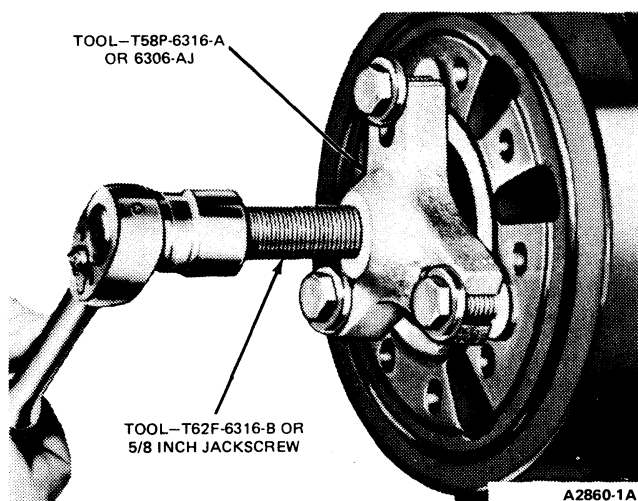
Crankshaft Vibration Damper Removal—E-100—E-350
